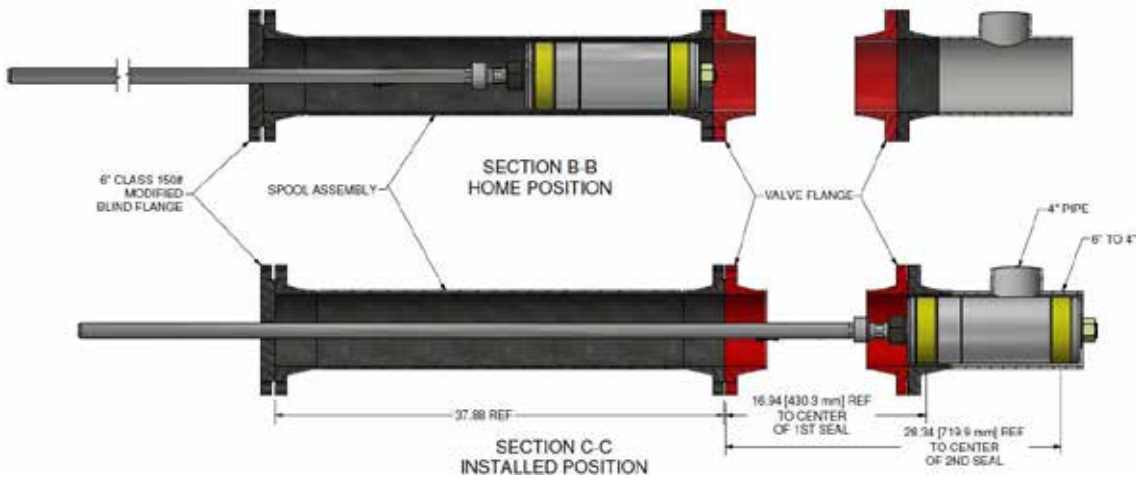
The DBB housed in the spool assembly prior to deployment (top), and after it has been deployed through the valve and into its setting position by the push rod (bottom).
